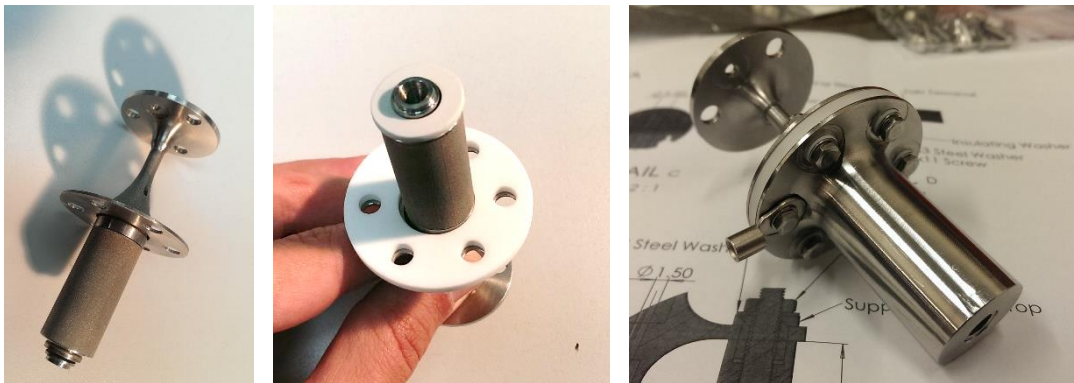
AMR-X-0 fit-assembly steps to establish proper tolerances prior to EB welding.
